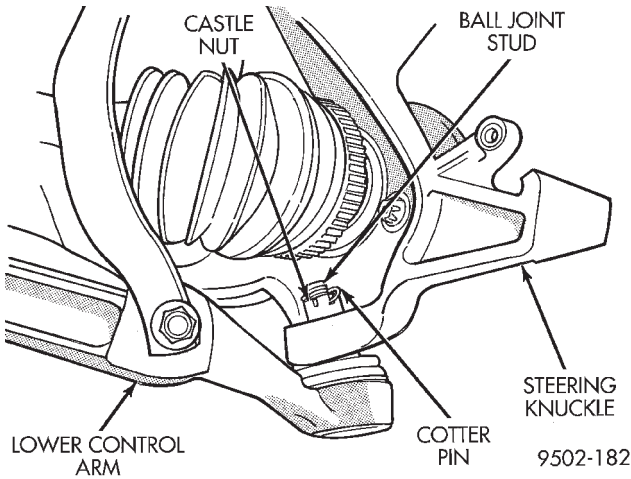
Lower Ball Joint to Steering Knuckle Attachment
